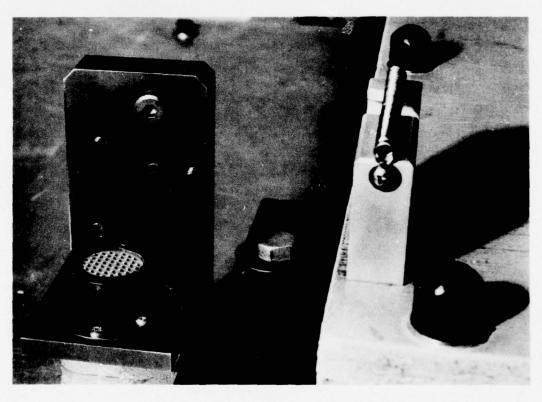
Tooling Board Connector Fixture - Down Position (Dwg. No. F40100)
